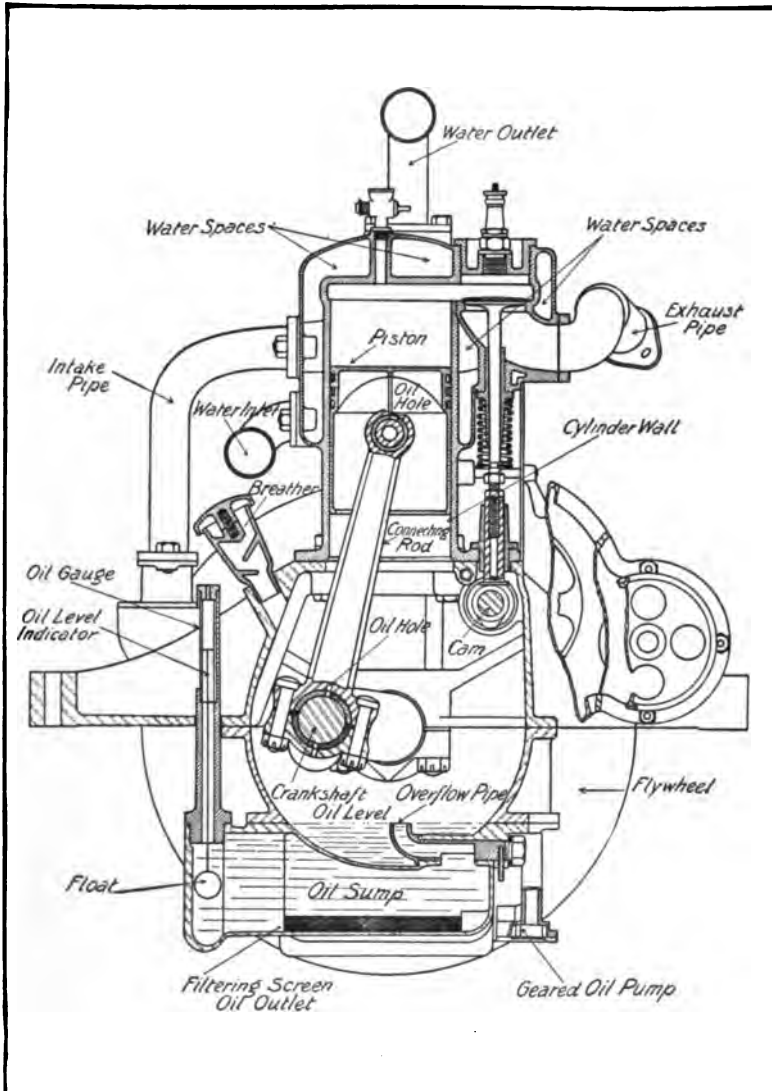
Sectional view of typical motor, showing parts needing lubrication and method of applying oil by constant level splash system. Note also water-jacket and spaces for water circulation.
